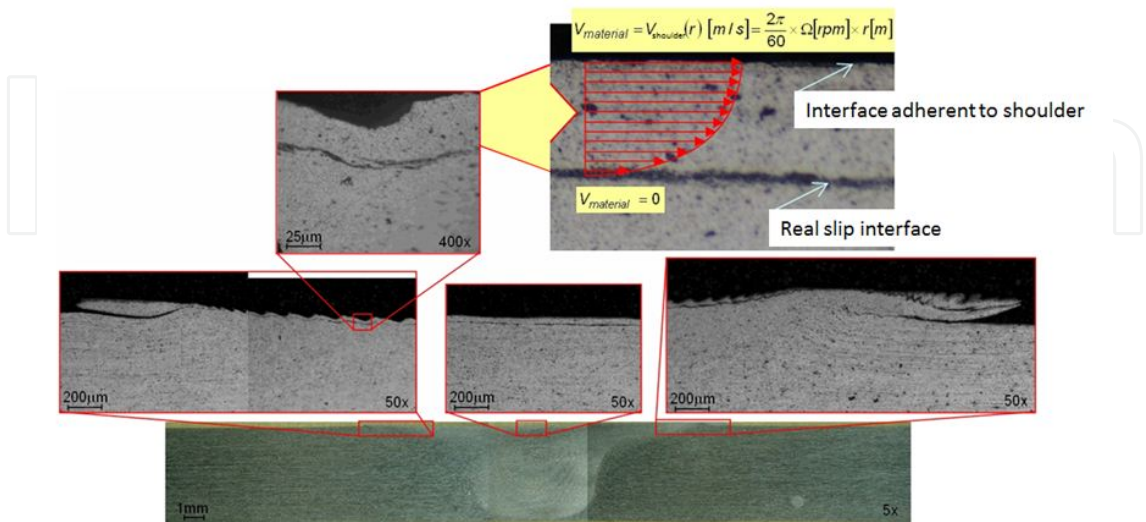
Superficial layer of weld bead material in contact with shoulder that is dragged to rotate along with the shoulder generating a real slip interface about 10 μm within the material.
